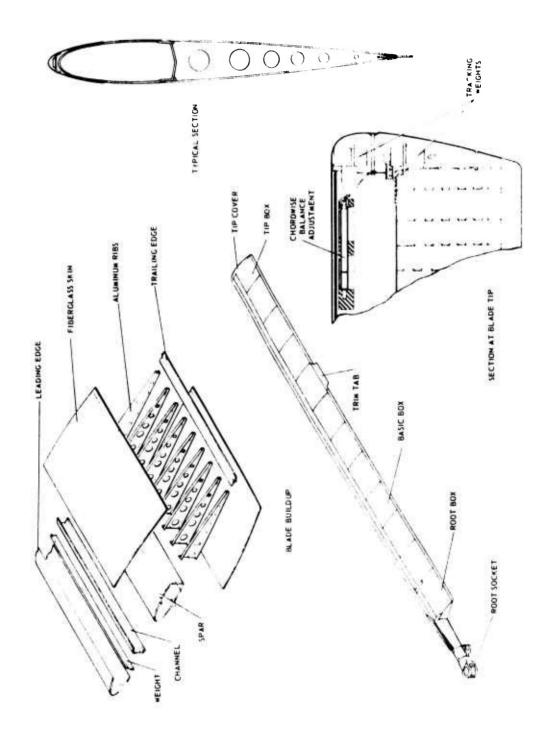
CH-47A ROTOR BLADE ASSEMBLY.
